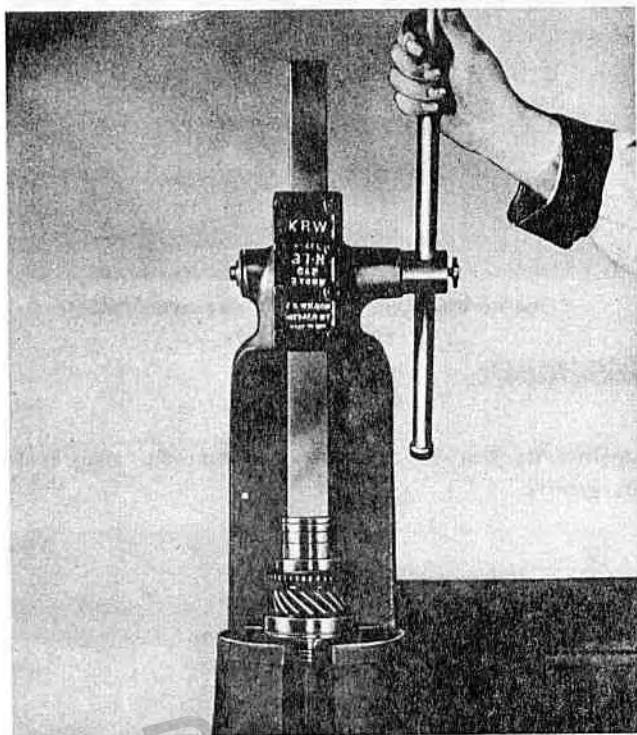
Pressing on the Clutch Shaft Rear Bearing
